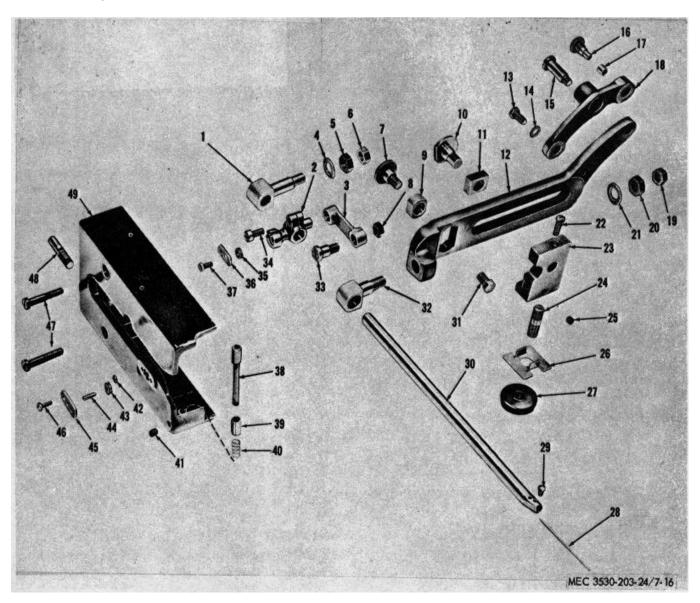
Button sewing machine faceplate and needle bar vibrating lever, disassembled.
